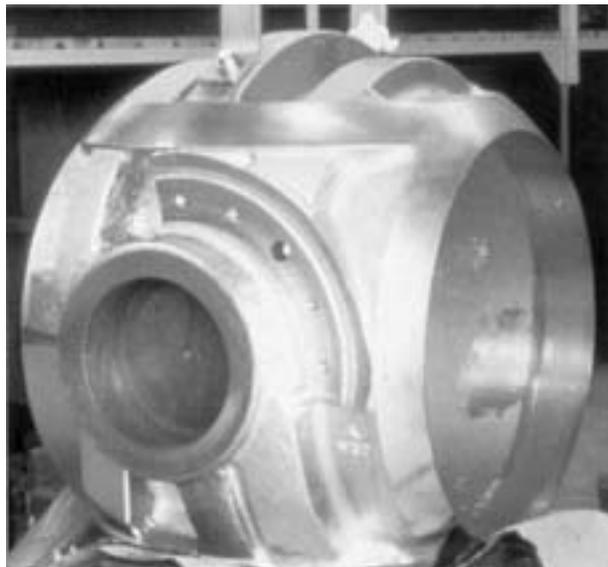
Plated 105cm ball valve plug. Thickness uniformity and corrosion resistance are major requirements of the deposit.
